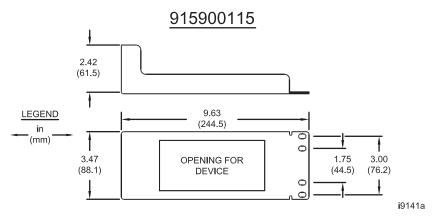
SEL-9510 Half-Rack Single-Opening Panel Cutout Dimension Drawing (for mounting side-by-side with an SEL-500 series relay)
